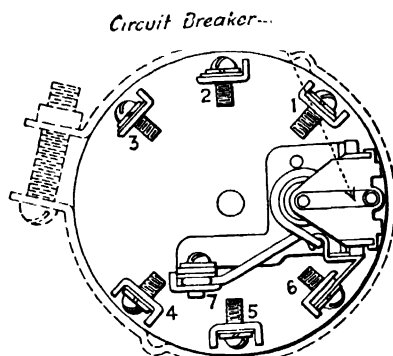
Rear View Showing Terminals and Circuit-breaker.
